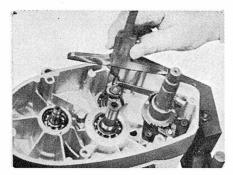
Refer to text for measuring and setting the gear shift assembly on 50 and 80cc models.
